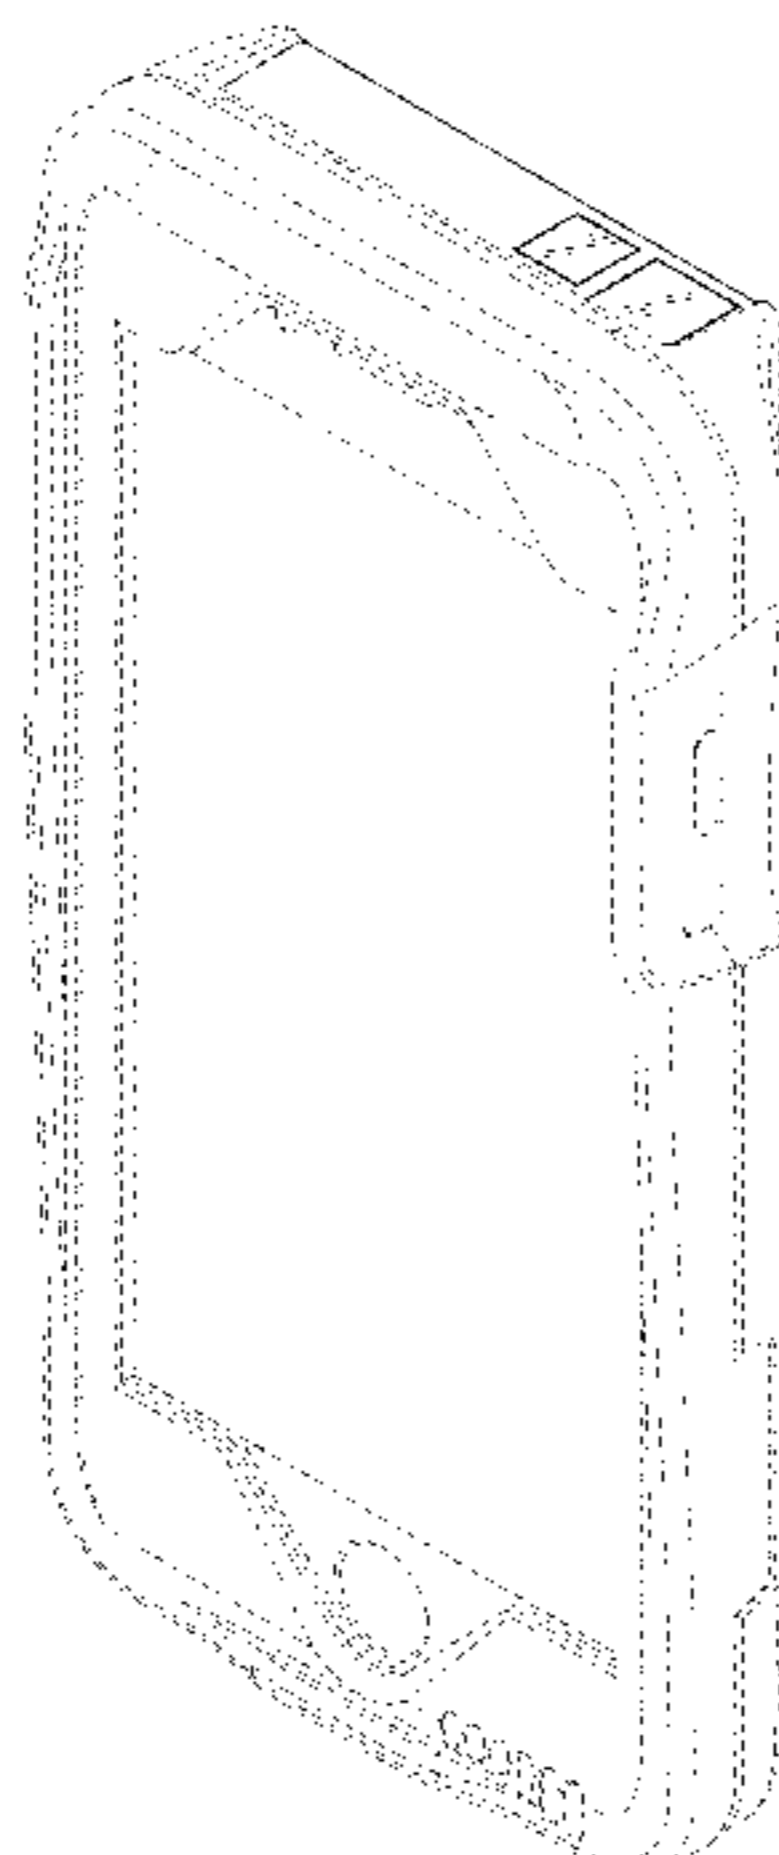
is a top, front, right-side perspective view of a fifth embodiment thereof;
